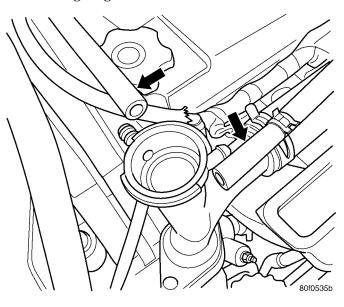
SMALL HOSES AT HOUSING - 2.4L TURBO
